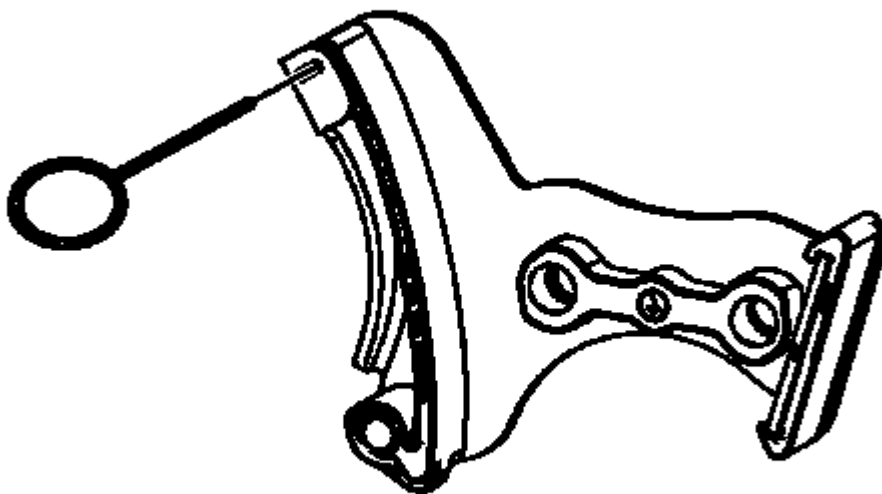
Identifying Camshaft Intermediate Drive Chain Idler & Bolt
